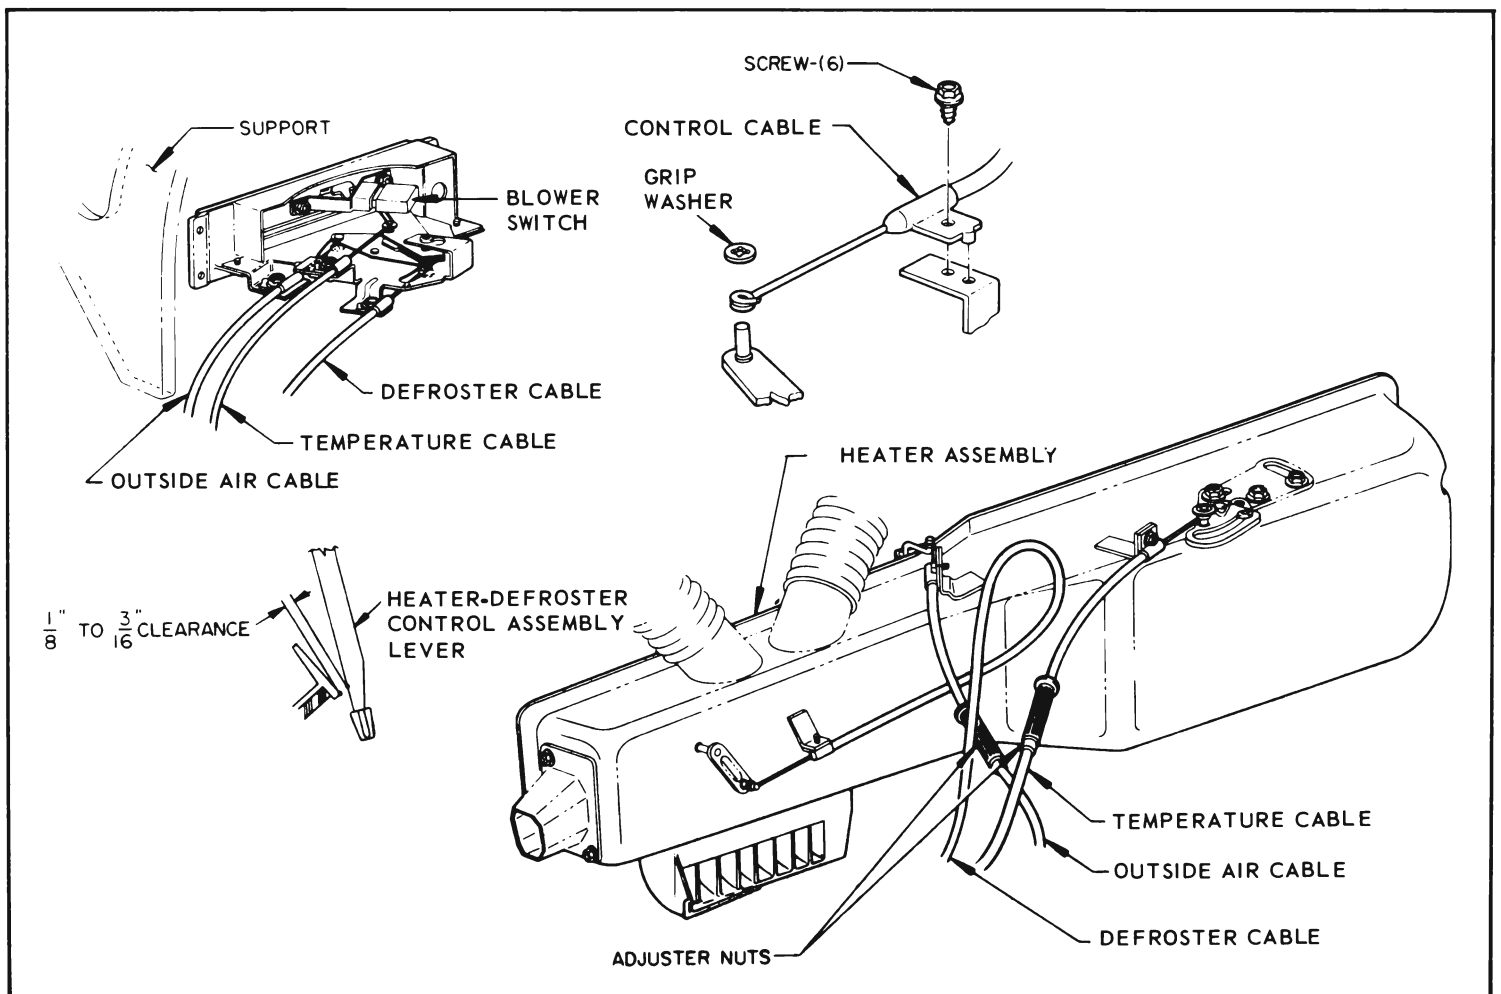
Control Cable Installation - 45000, 46000 and 48000 Series
